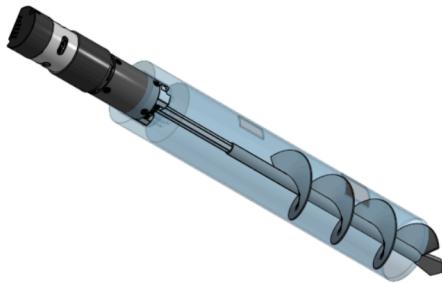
CAD assembly of sample collection mechanism. Sheathed auger is used for sample collection and selective storage. Auger is rotated by DC planetary gear motor, and full system is moved vertically using a stepper motor and lead screw.
